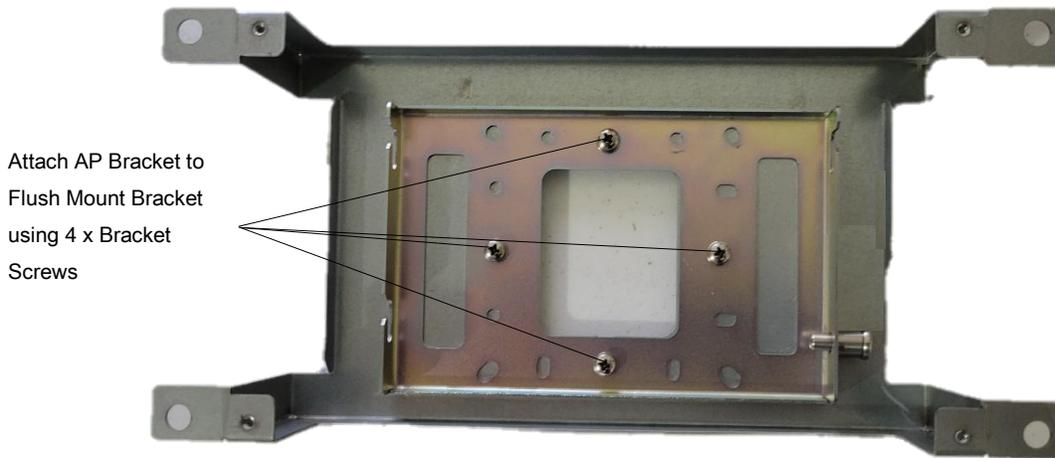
APV3-DAS - Mounting Standard Mounting Bracket to Flush Mount Bracket
